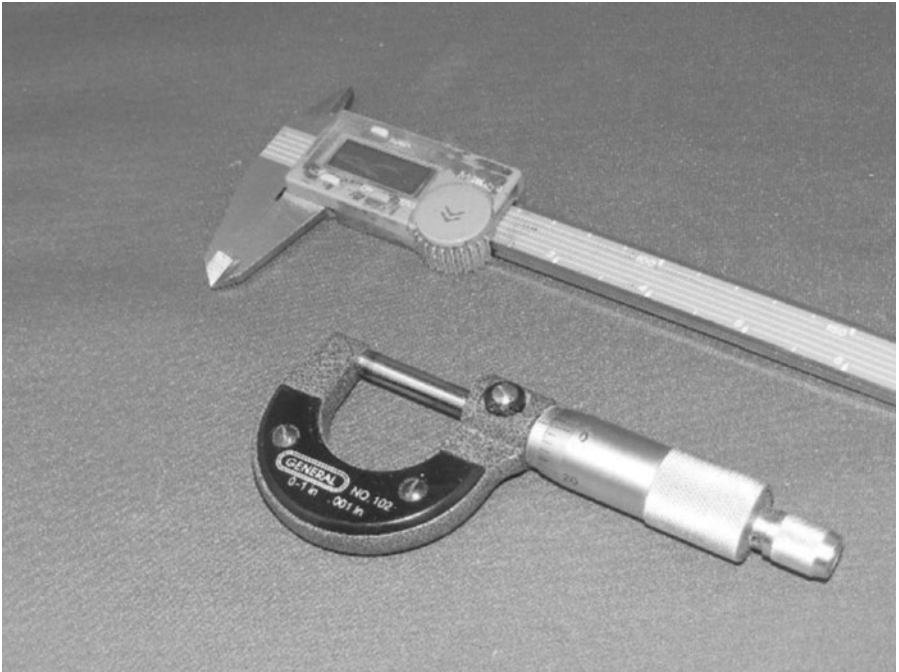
Micrometer and caliper for use in testing the accuracy of both machine and cut parts.
